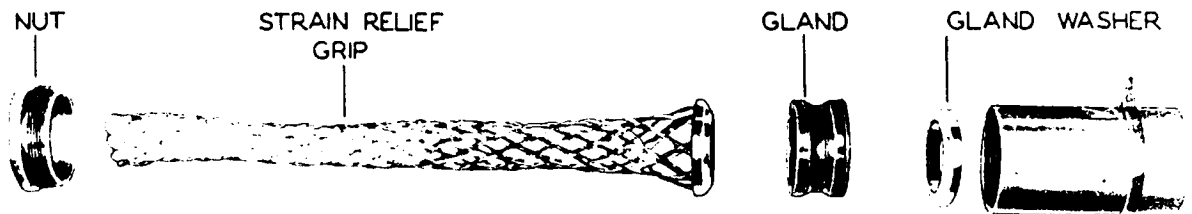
Similar to Figure 10, but has 18-8 stainless steel Kellems cable strain relief grip. Left hand thread each, long or short housings. Basic type: 10-101332, 10-101334, 10-113657, 10-248588.
